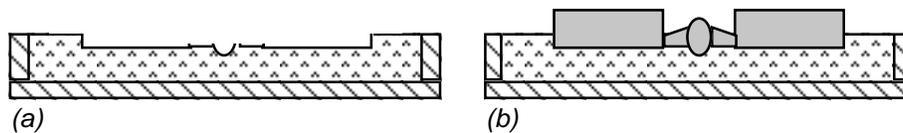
(a) Cross section of a match mold and (b) the match mold with its complementary pattern tree inserted.
